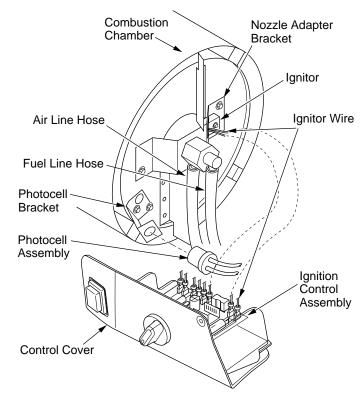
Disconnecting Ignitor Wires from Ignition Control Assembly (125T, 170T Model Shown)
